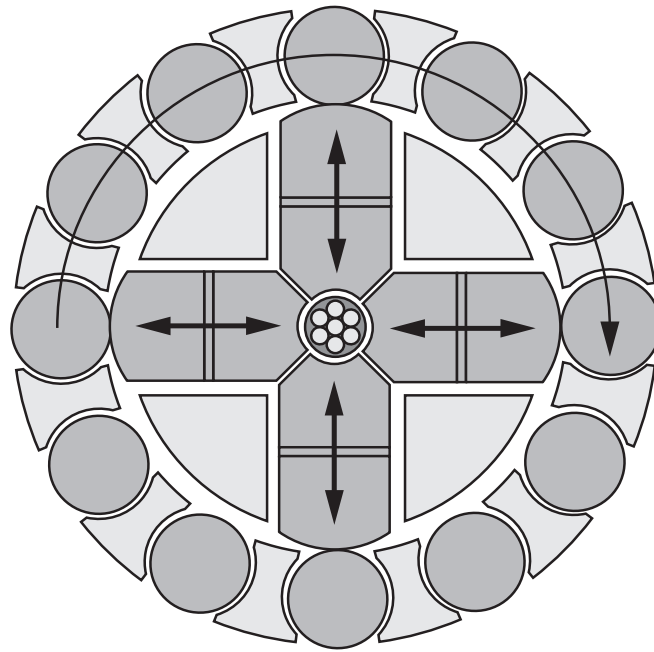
Cross-sectional view of a rotary swager for attaching swaged sockets
